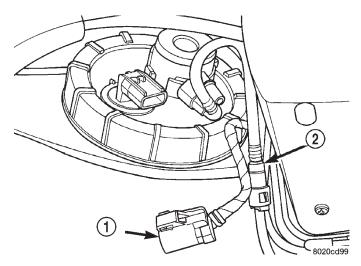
Pump Module Electrical Connector 1 – ELECTRICAL CONNECTOR
